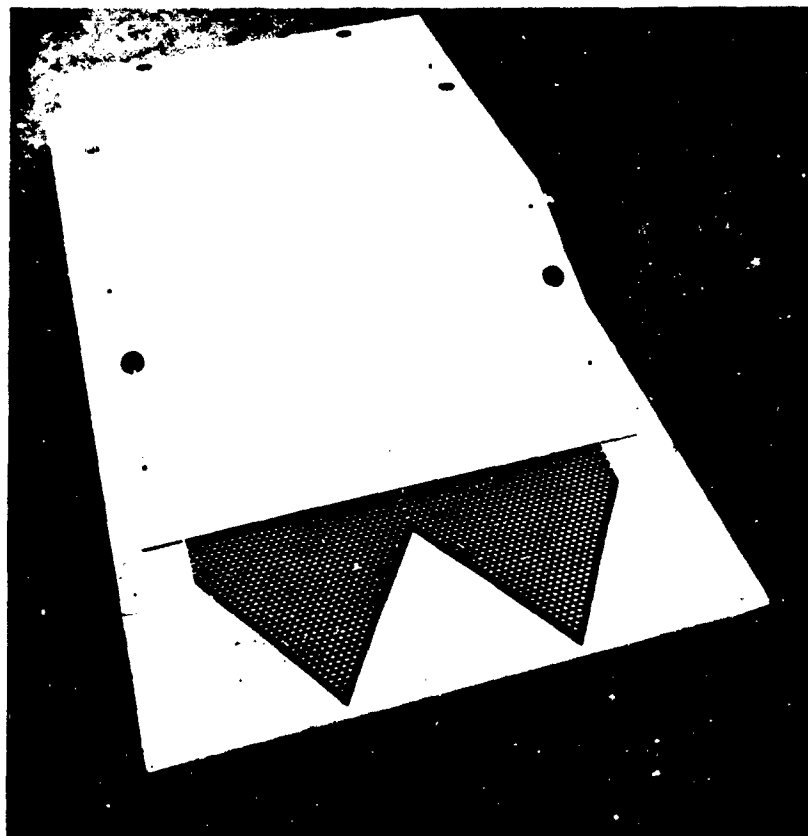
ASSEMBLY AFTER EXPLOSIVE LOADING
